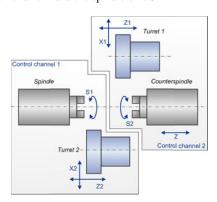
The kinematic scheme of NAKLON 535 machining center.
